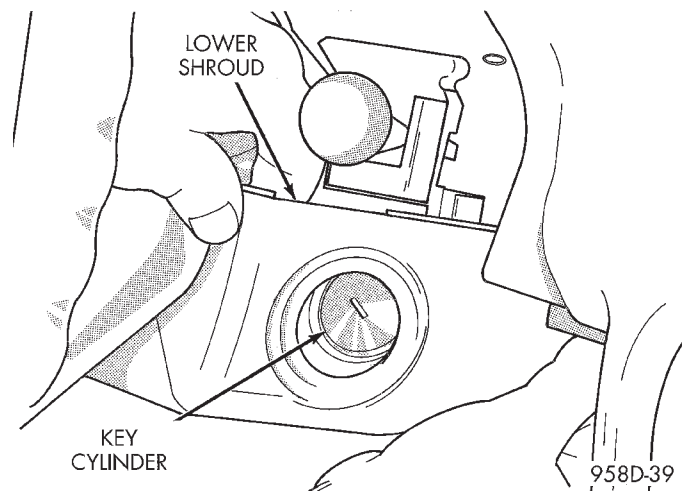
Remove Lower Shroud From Ignition Cylinder
